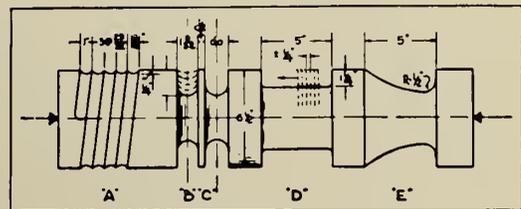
Types of Milling Cuts Possible to Make by Multi-Passes of the Planing Nozzle.
